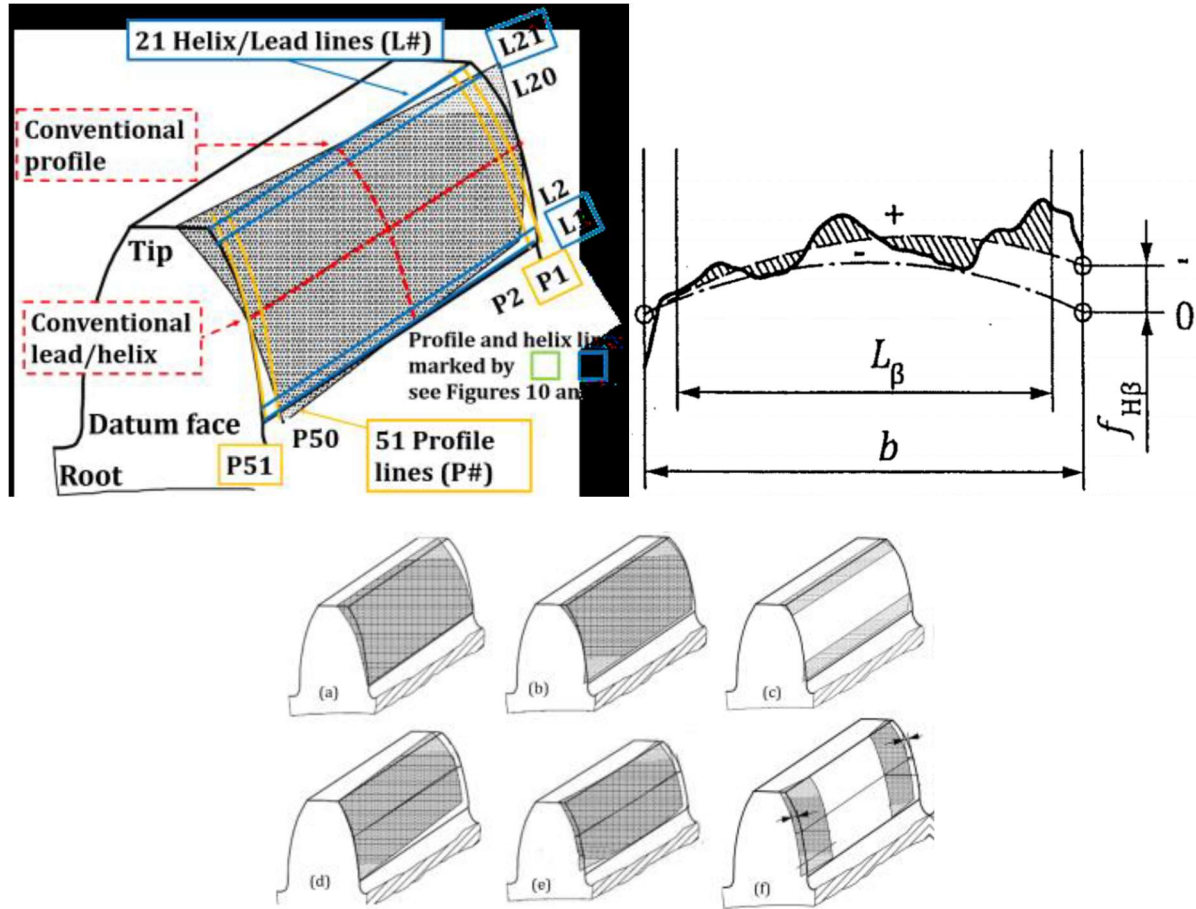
Gear flank with modification/deviation of involute helical gears [after 11, 12]
